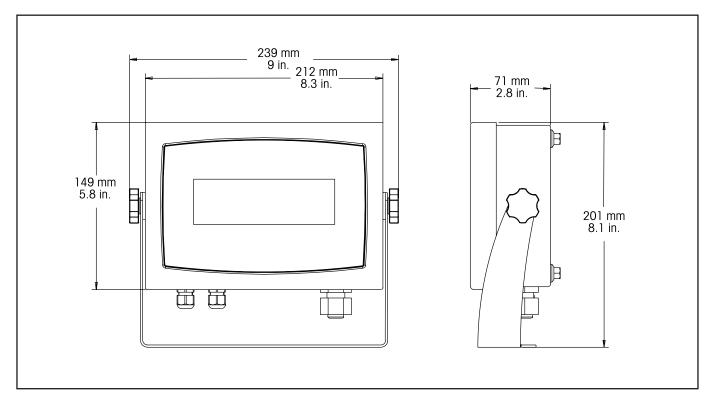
T31XW Indicator Overall Dimensions with Mounting Bracket.
